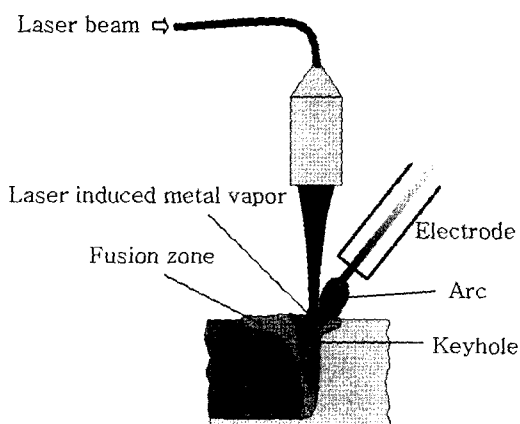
Schematic view of Nd:YAG laser-GMA hybrid welding
